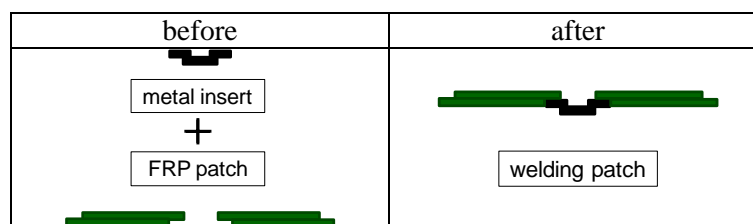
Metal insert and GF-TP patch before and after pre-consolidation to *welding patch*.
